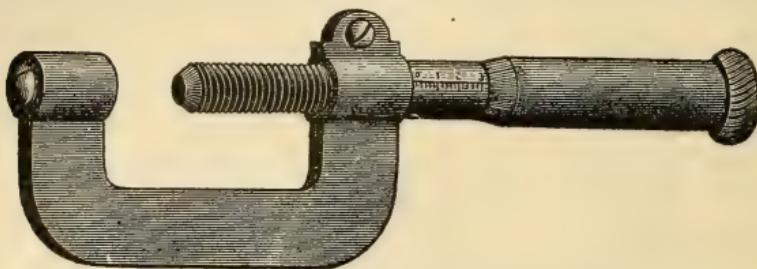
Micrometer Calipers for measuring Lead Plugs.
